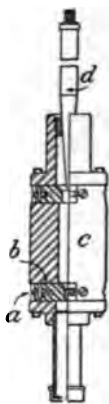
g—Casing cutter. a, knives; b, steel blocks; c, steel frame; d, mandrel.
